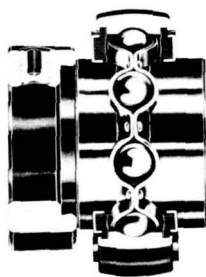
Angular-contact ball bearing. (Courtesy Marlin Rockwell Corporation.)
